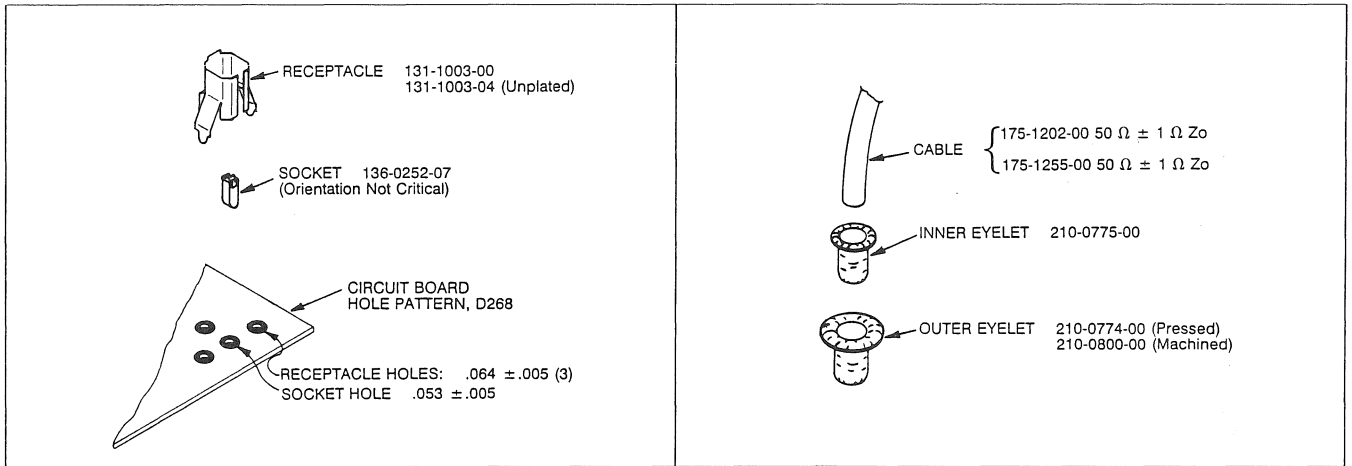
ASSEMBLED CONNECTOR PARTS LABELED.
